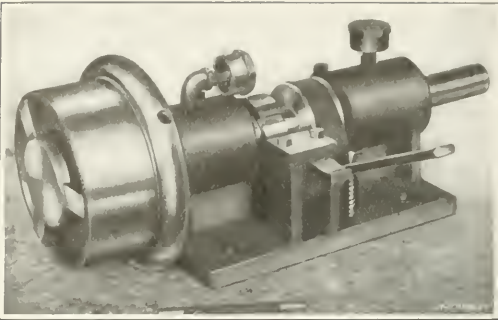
Special Rotary Chuck used on Besly Disk Grinder for surfacing Gas Plugs
